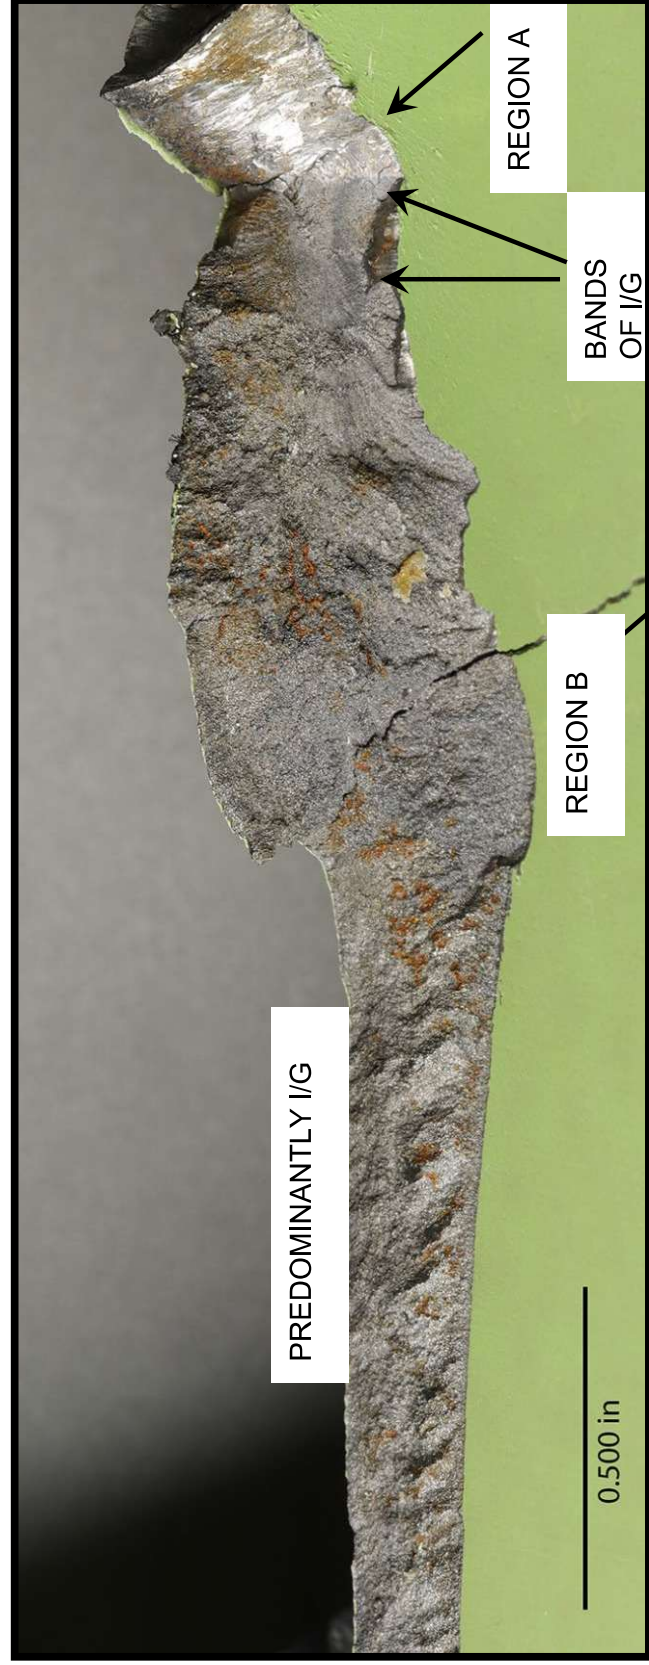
Detailed view of Upper Drag Strut- Longitudinal Fracture A.
